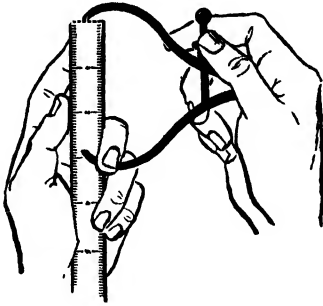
Setting or reading an outside caliper. (South Bend Lathe Works)
